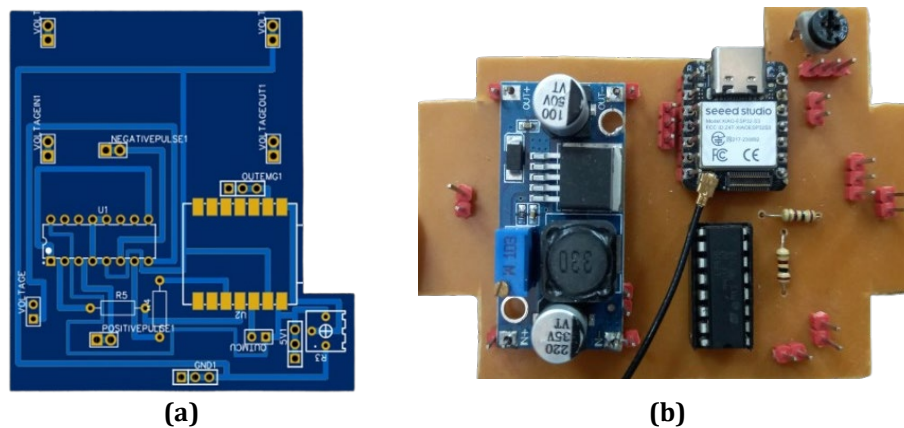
PCB (a) Layout; (b) Biphasic electrical stimulation PCB
